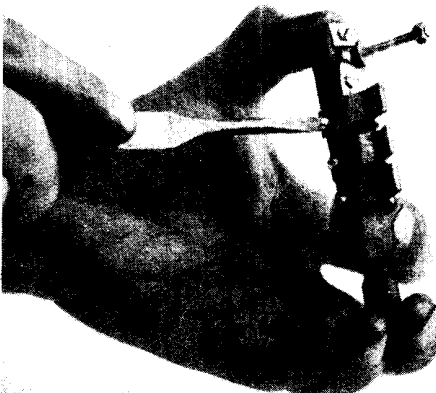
Details of ball-and-socket movement and method of attaching the U-shaped plugs
